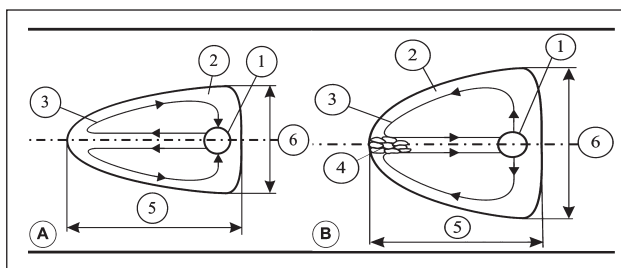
Schematic representation of weld-pool motion in welding of 1 mm thick FSS sheet with a) high and b) low welding speed. 1 – welding arc, 2 – weld pool, 3 – direction of weld-pool motion, 4 – intermediate layer of grains, 5 – weld-pool length, 6 – weld-pool width
